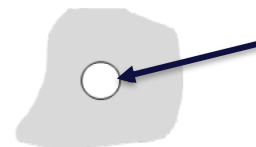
Hole diameter – $\varnothing 20$ mm (0.8 in.)
